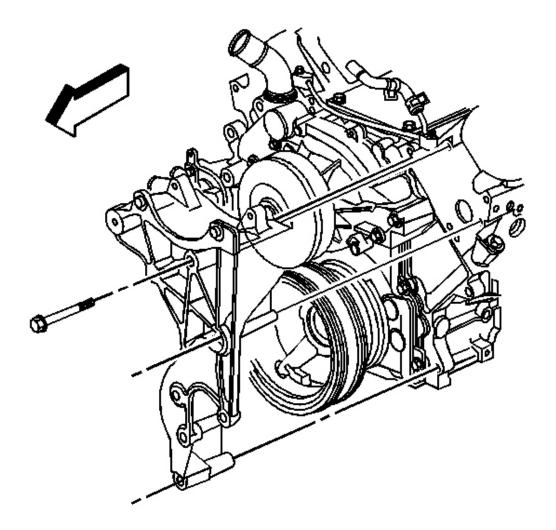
View Of Generator Bracket & Bolts (4.8L, 5.3L & 6.0L) Courtesy of GENERAL MOTORS CORP.
